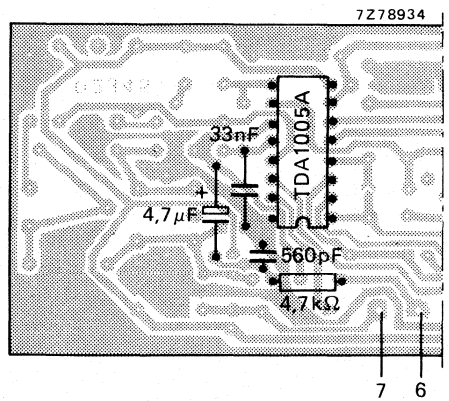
Printed-circuit board component side, showing component layout of Fig. 15.
